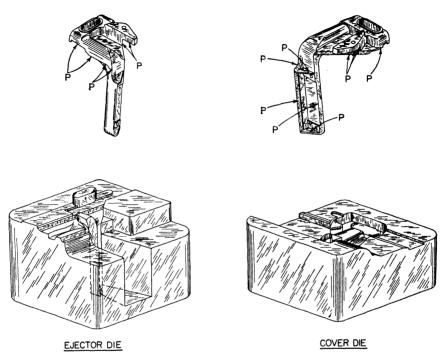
Ejector- and cover-die halves for another casting, the design of which also necessitates use of a die having an irregular parting line. The parting line on the casting is indicated by P.
